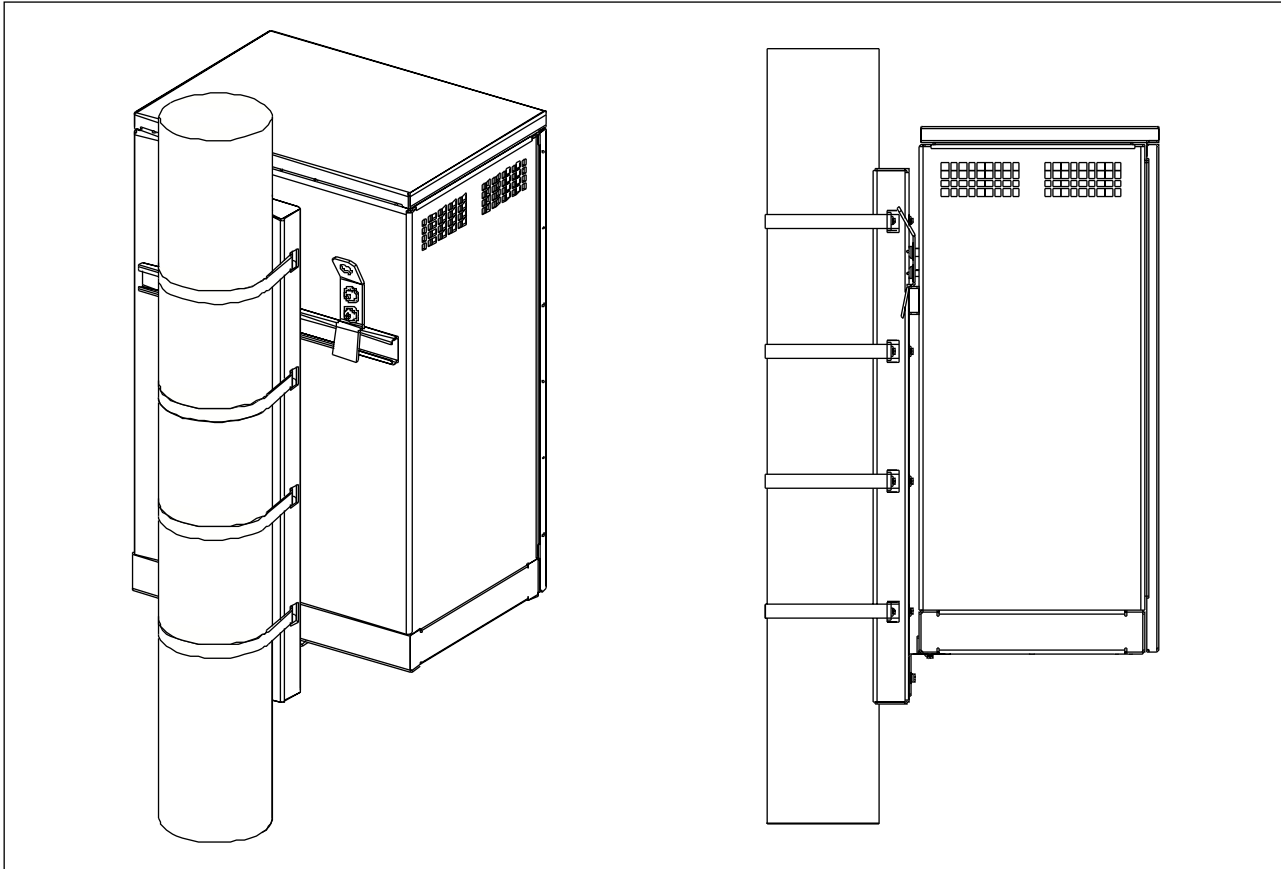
Cabinet Installed on Pole-Mount Assembly
